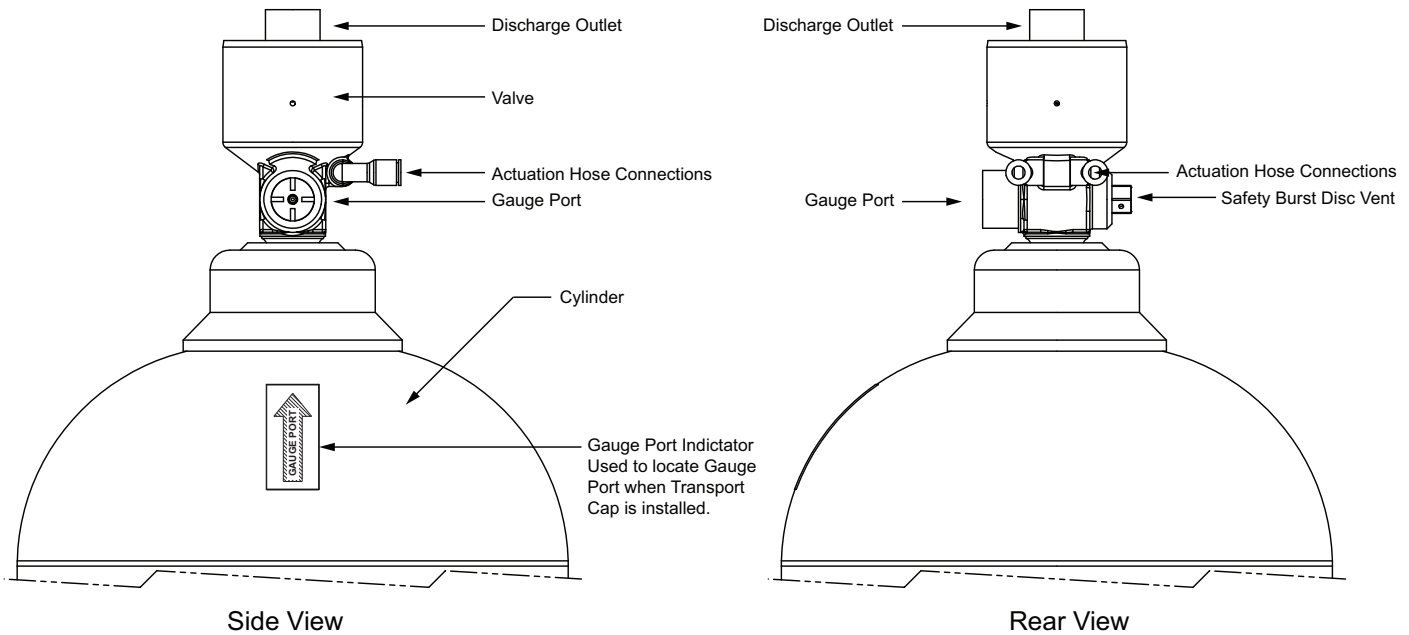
Valve General Arrangement, P/N 38-400000-001
